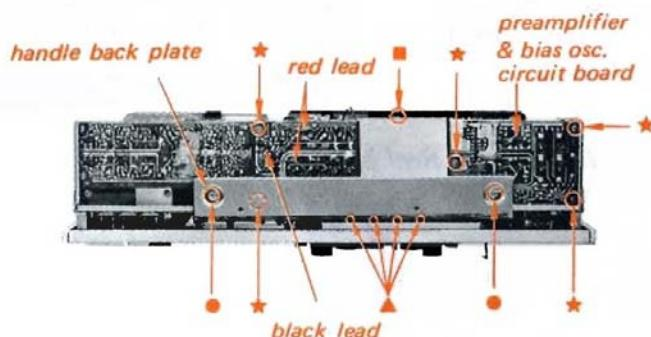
Preamplifier & bias osc. circuit board removal
